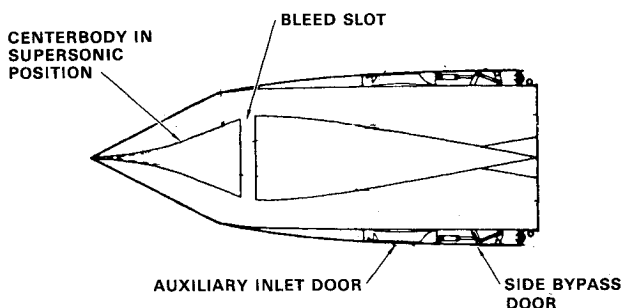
2.3/2-D/EX inlet for GE21/J11B19 engine.
